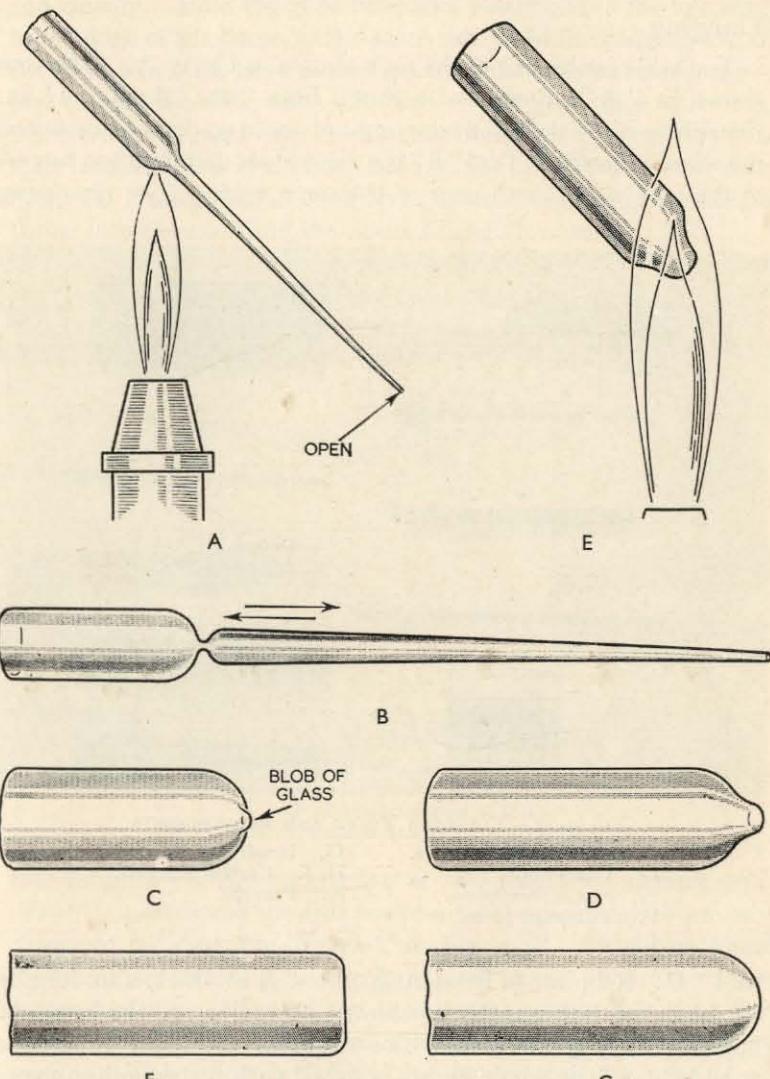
METHOD OF MAKING CLOSED ENDS
